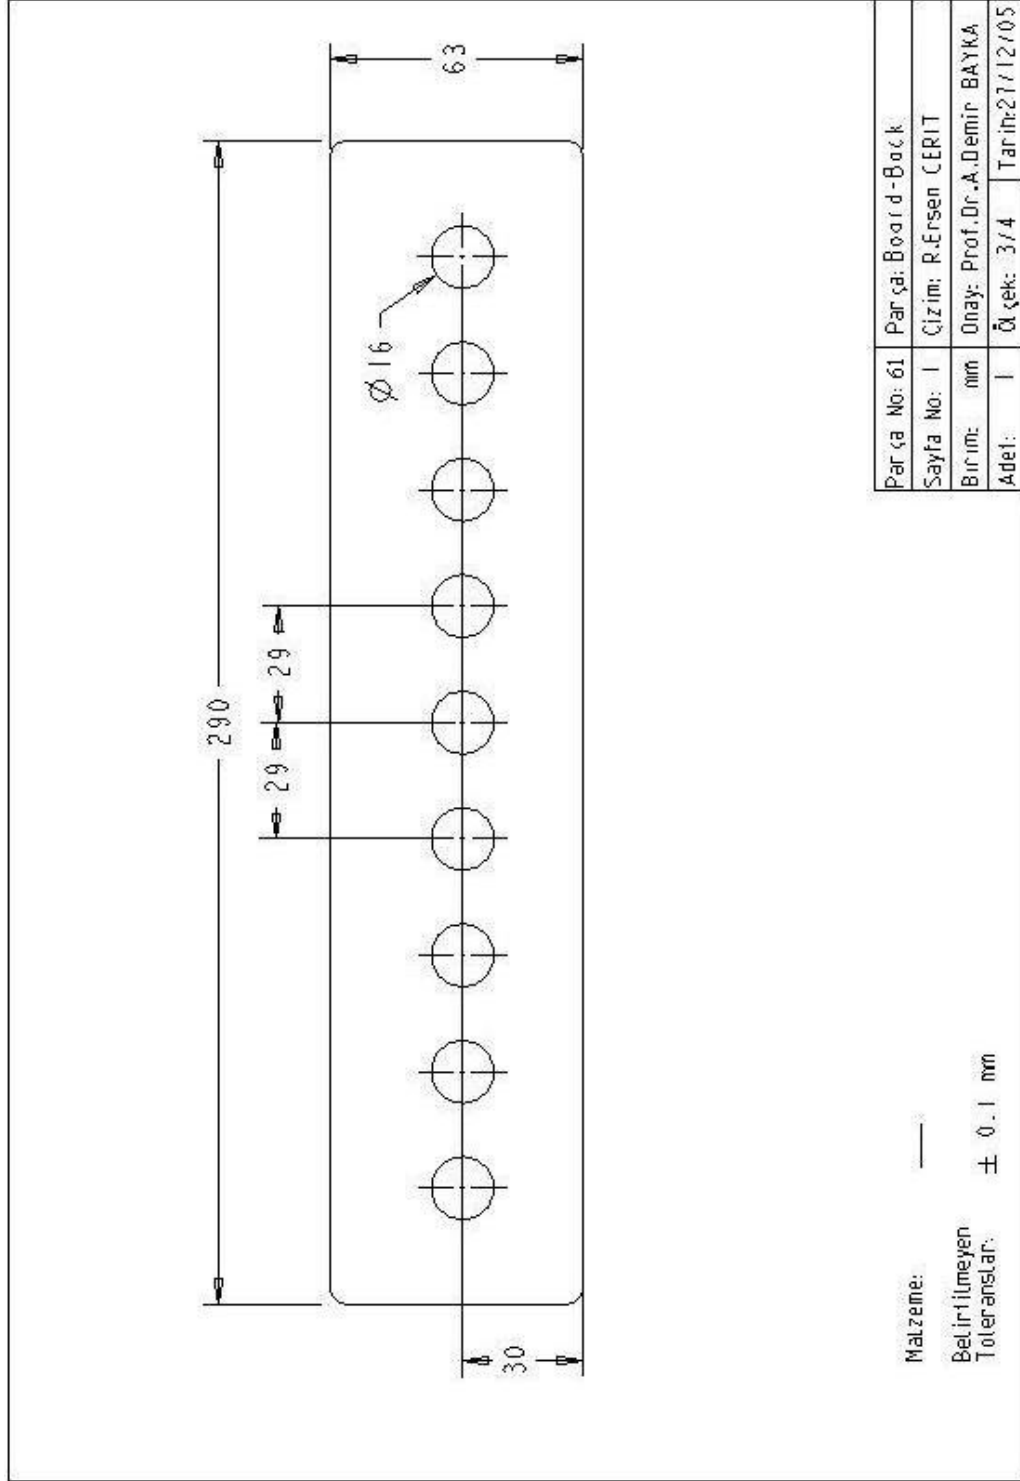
Technical Drawing of Input-Output Box Back Cover.
